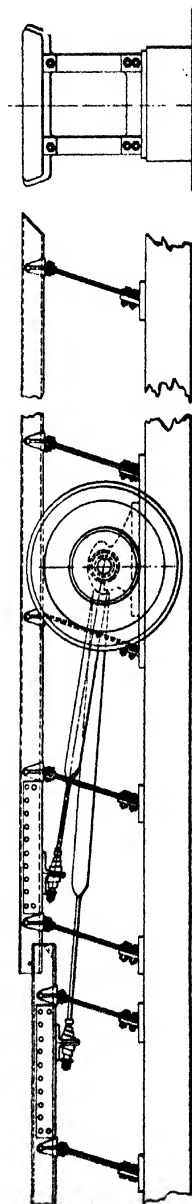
Zimmer picking conveyor. Side and end elevations.
